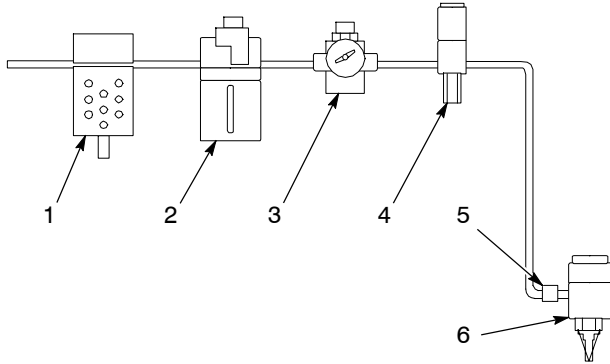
Air Line Connection Schematic with Quick-Release Valve on Valve-Open Air Inlet
